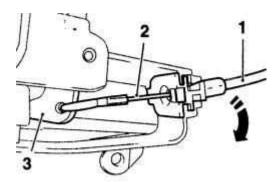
The core is a flexible rod for turning the lever locking button: 1 - a flexible rod, 2 - core, 3 - turning the lever
